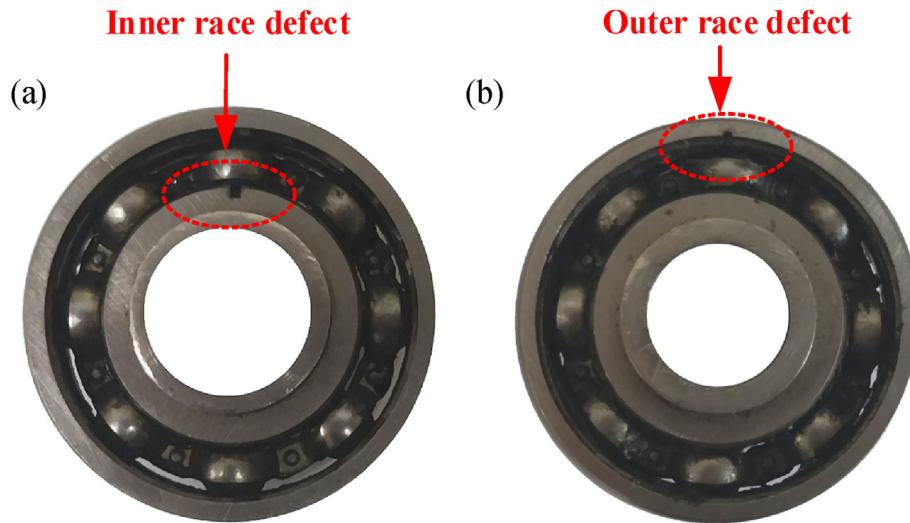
Defective rolling bearings with (a) Inner race defect, and (b) Outer race defect.
